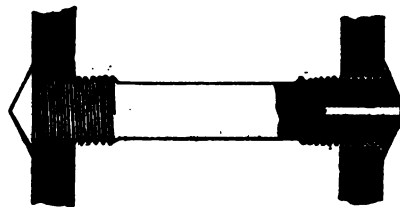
Screwed stay with hole for detecting escape of steam or water.
